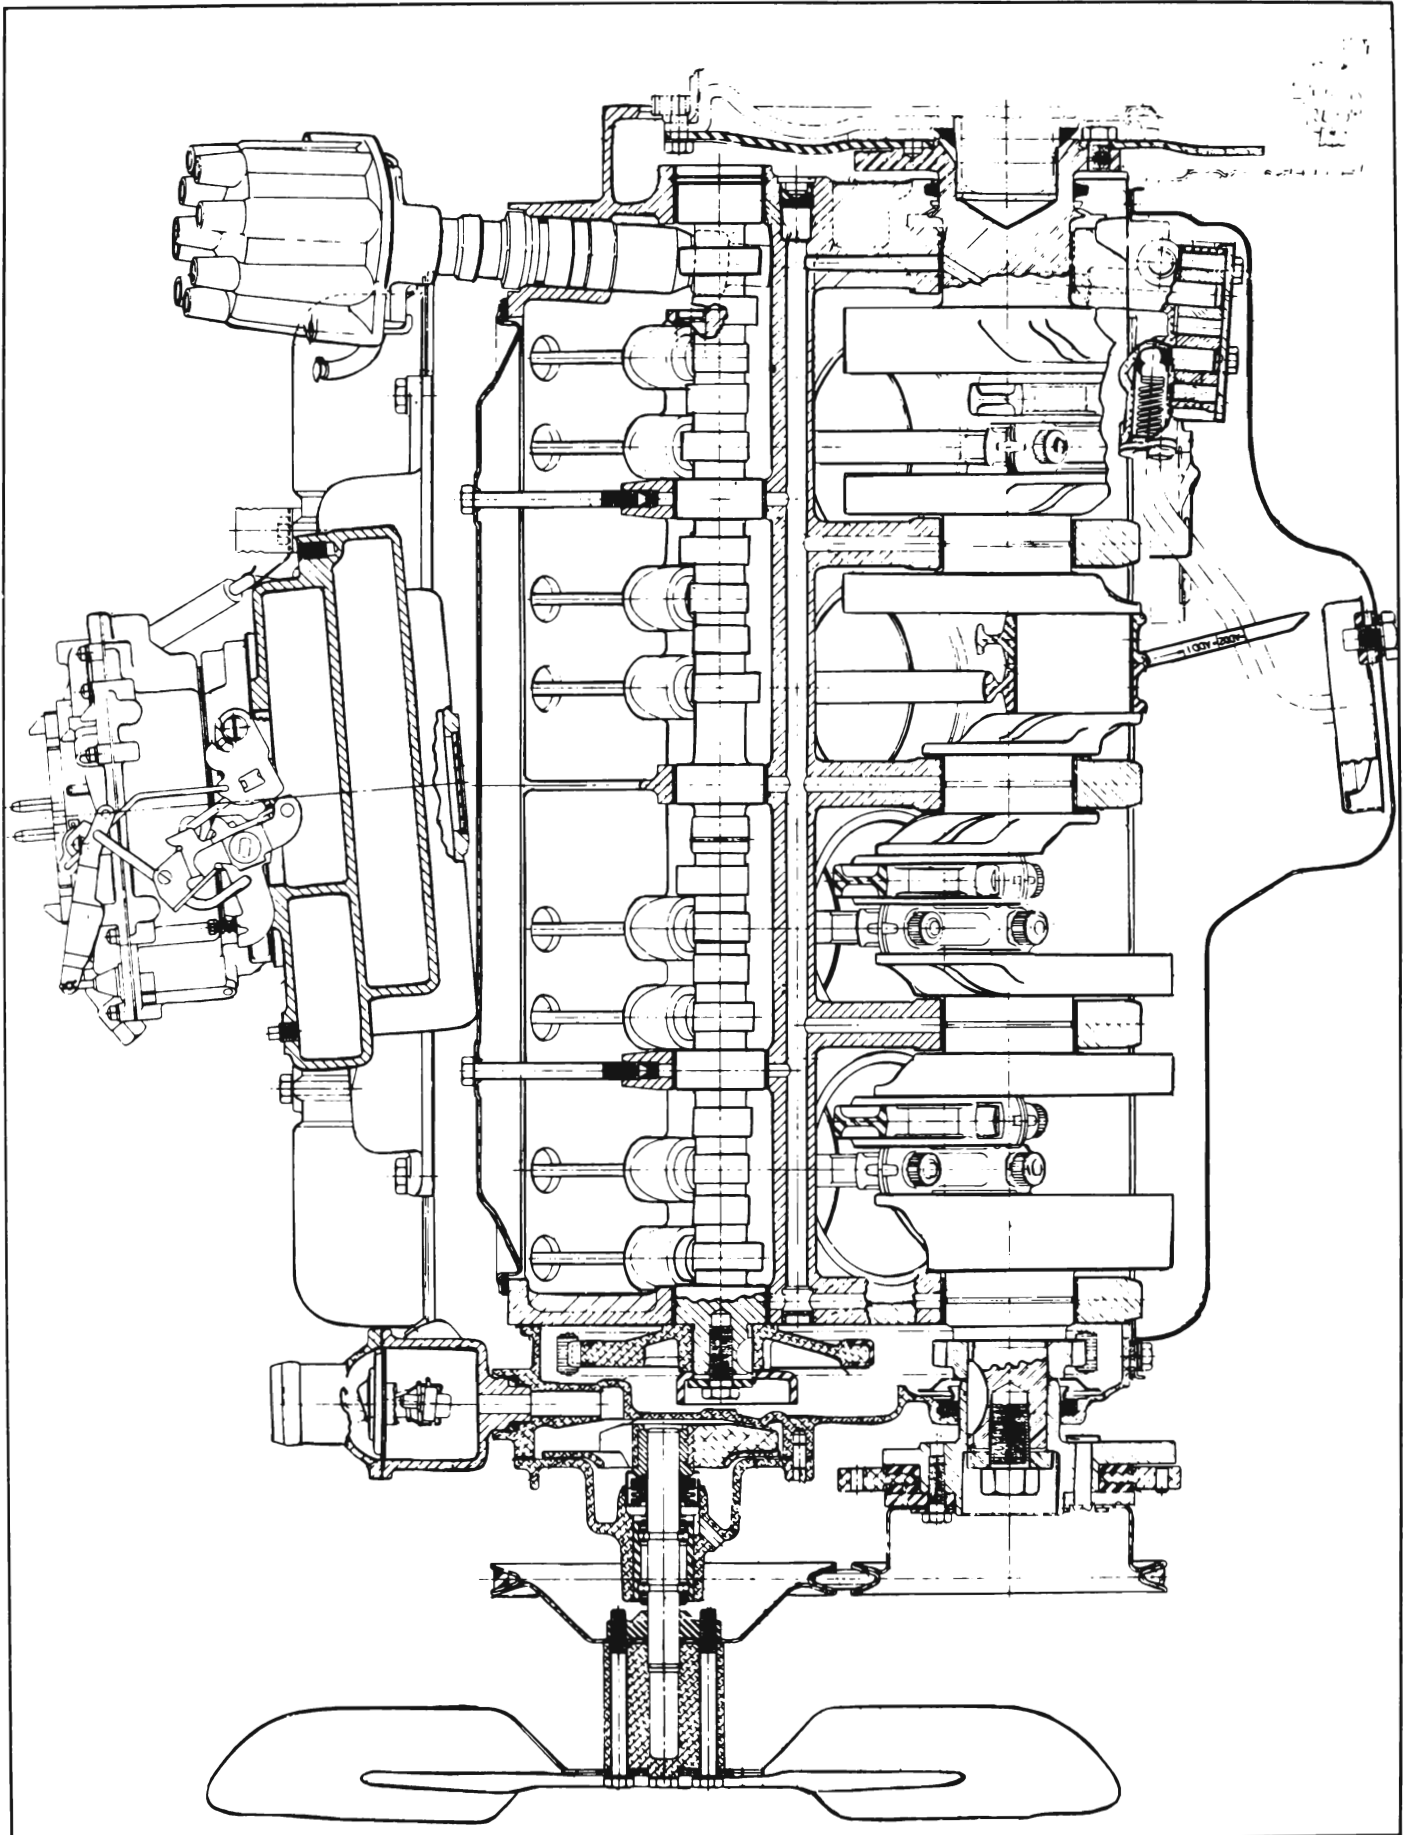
Cu. In. Engine Cross Section (Side View)
